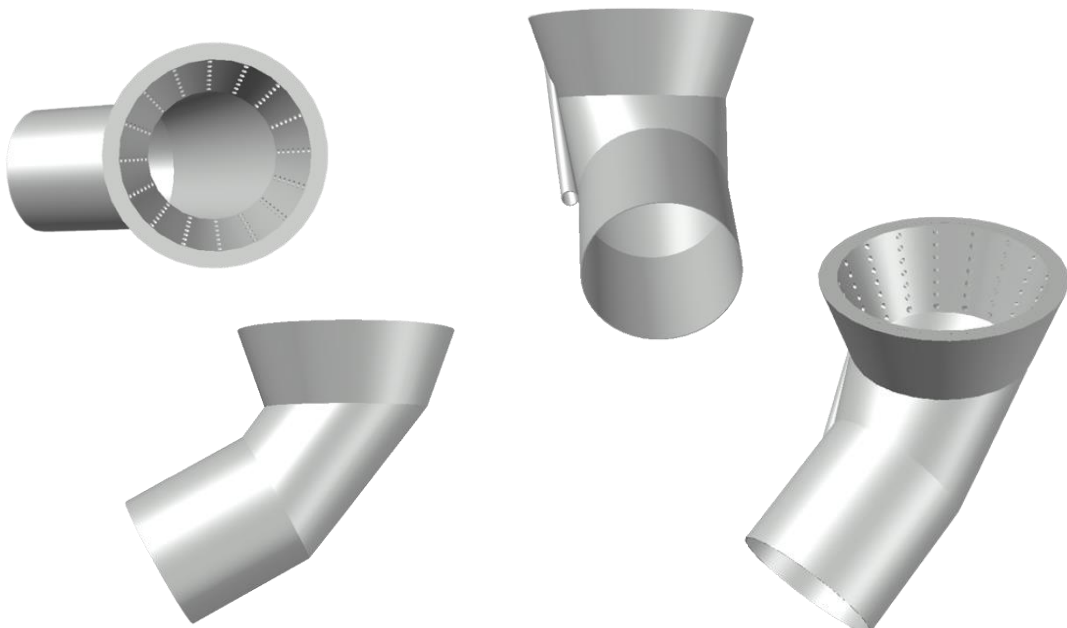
a) Top view of burner b) Left side view of burner c) Front view of burner d) Isometric view of the burner
